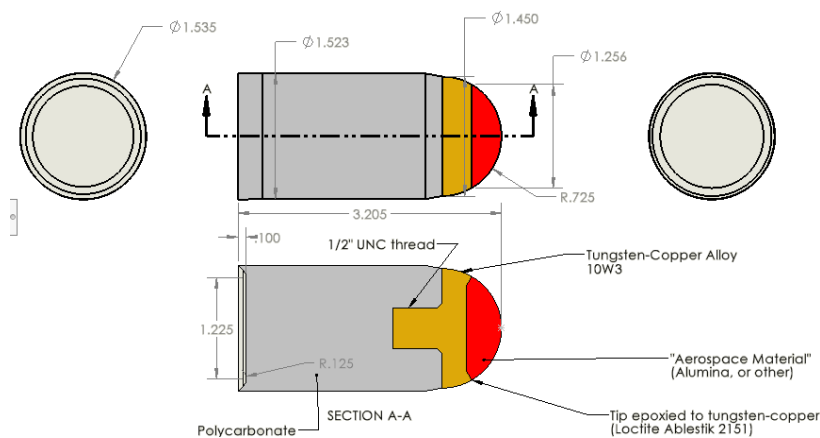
Assembled Projectile Schematic with Center of Mass Marked
